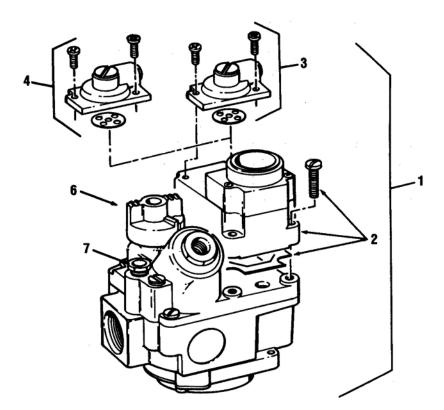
Computron 8000 - 600 – Gas Control Valve
